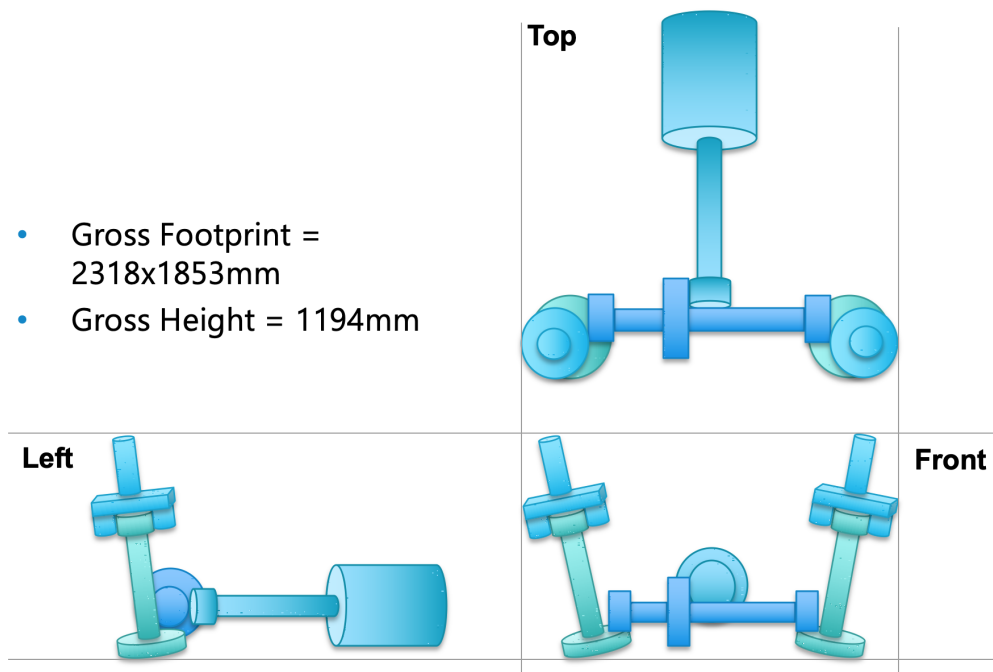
A Three View Drawing of the Transmission Assembly. Note here that the engine is incorrectly displayed as being in-line, not at a 10° declination.
